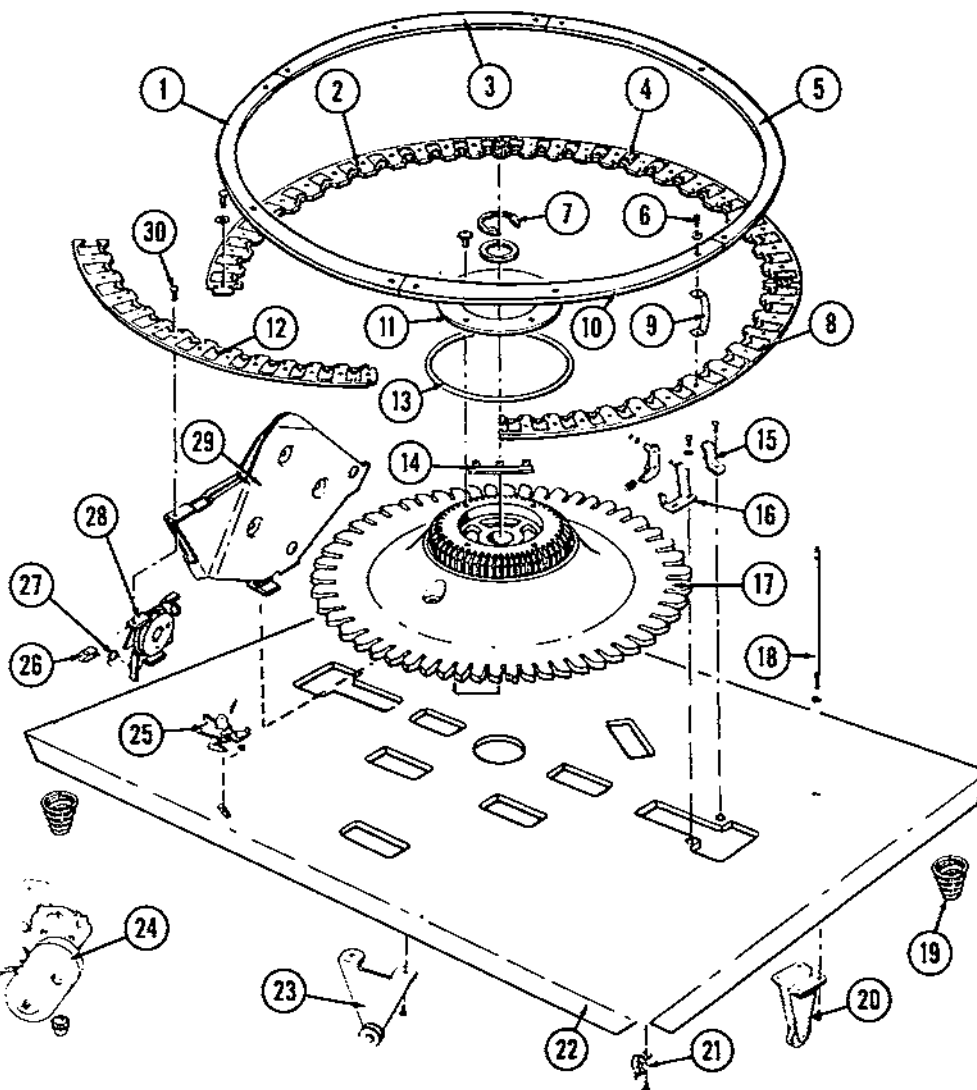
RECORD CARRIER AND CHASSIS MOUNTING PLATE 2610
